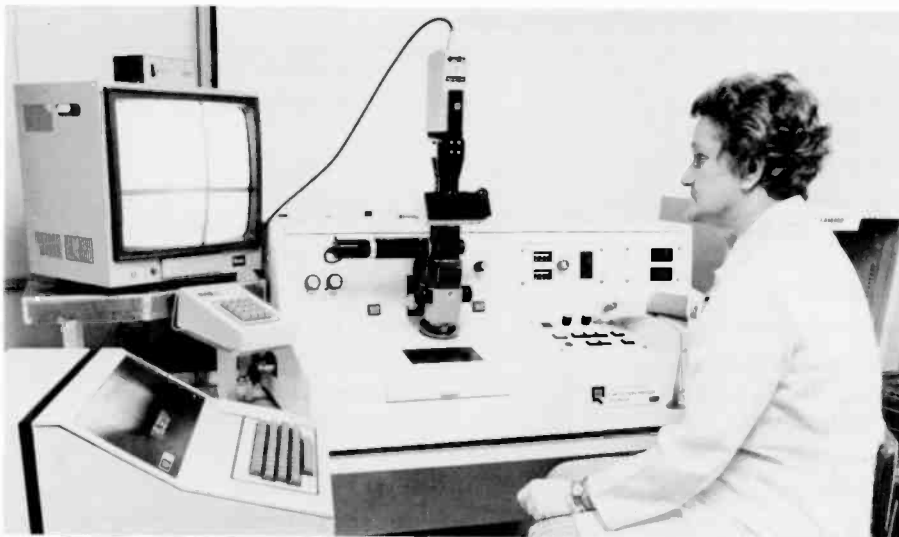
A Quantronix laser repair machine used to remove extraneous chrome spot defects on a completed mask. This allows preparation of masks with, in some cases, zero defects/inch².
